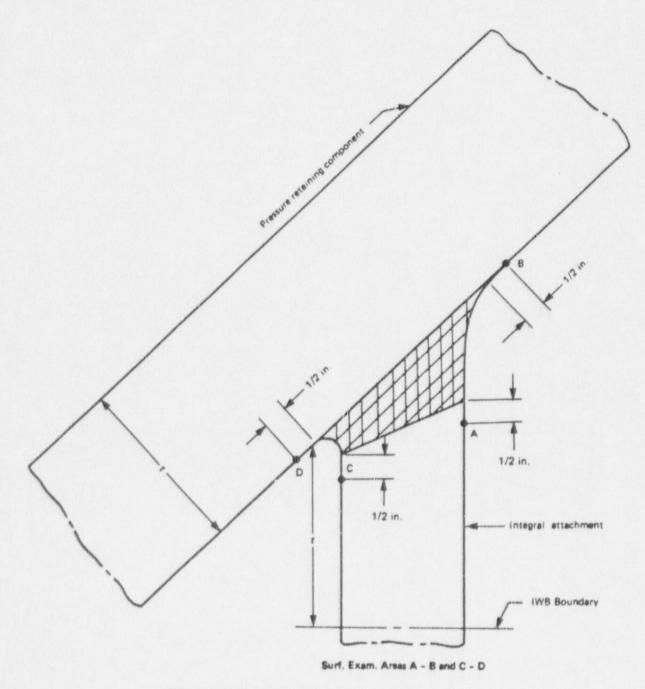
INTEGRAL ATTACHMENT WELD
